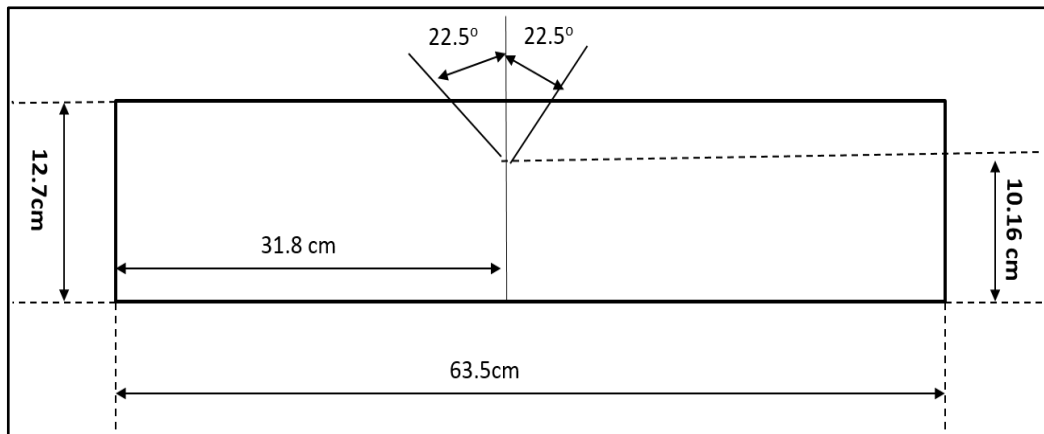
Impact testing requirements using ASTM D256 standard dimensions
